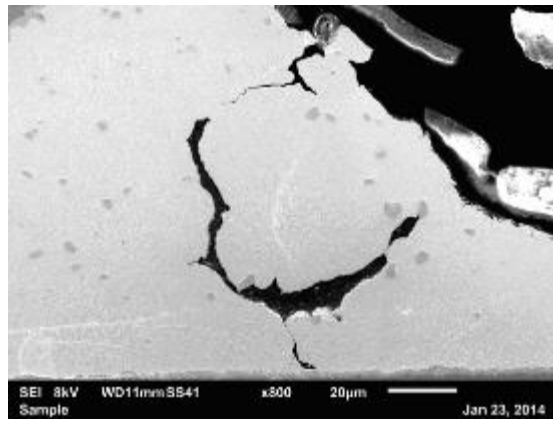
Cracking along Sn grain boundaries in QFP208 solder joint assembled using SAC307
